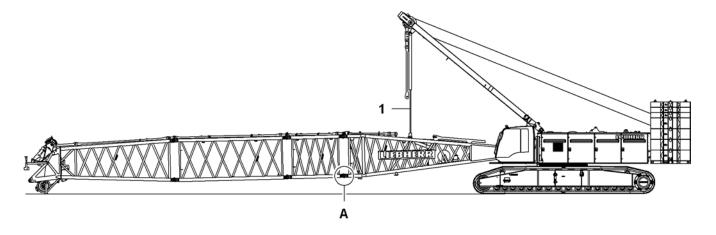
Bolting the boom base section to the main boom at the bottom
